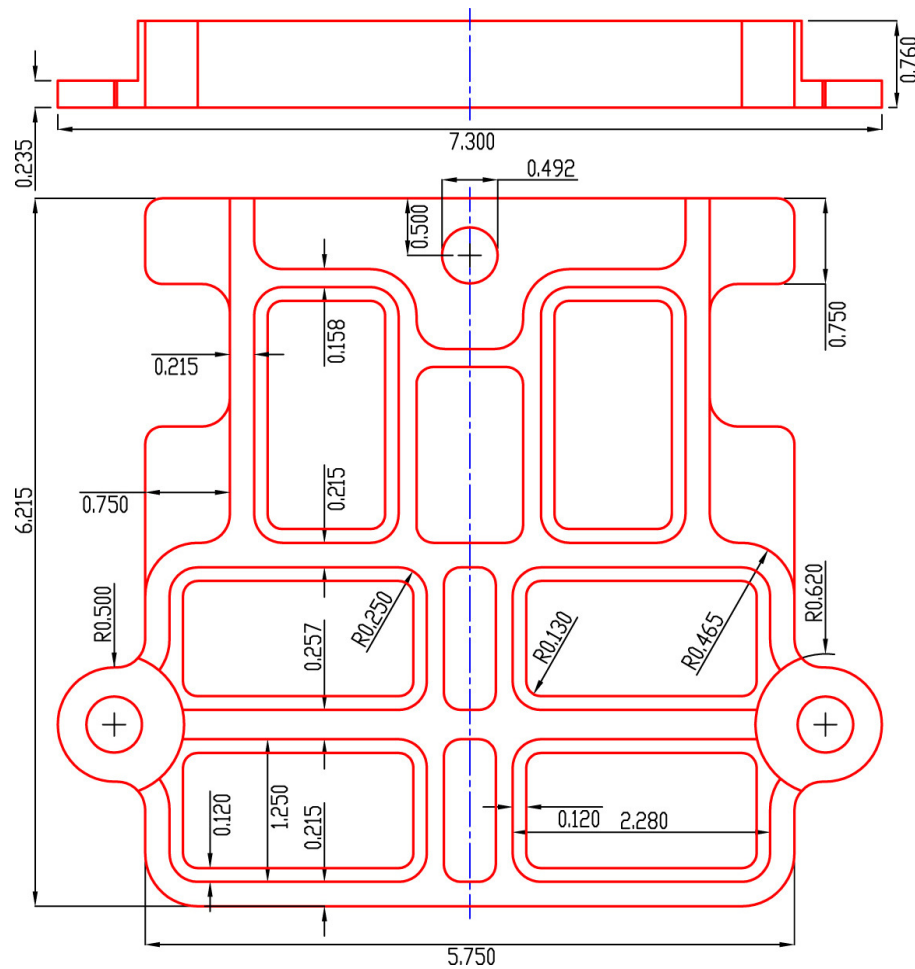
A 2-D drawing with the bottom view and side view of the frame. (unit: inch)
